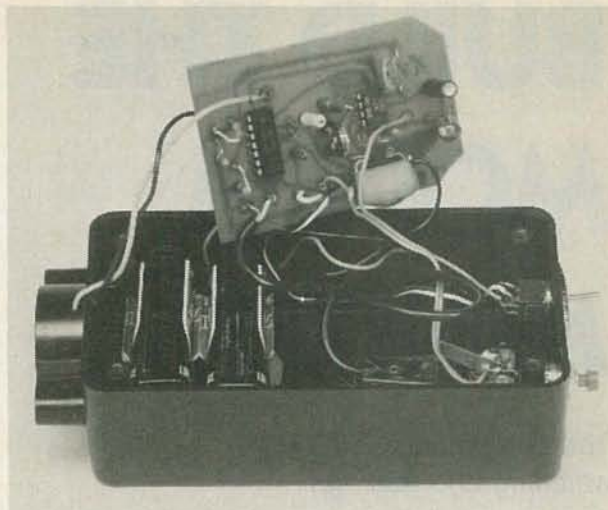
INSIDE THE BOX, compact parts placement and easy wiring is revealed. Nothing super-critical makes this a comfortable project.
